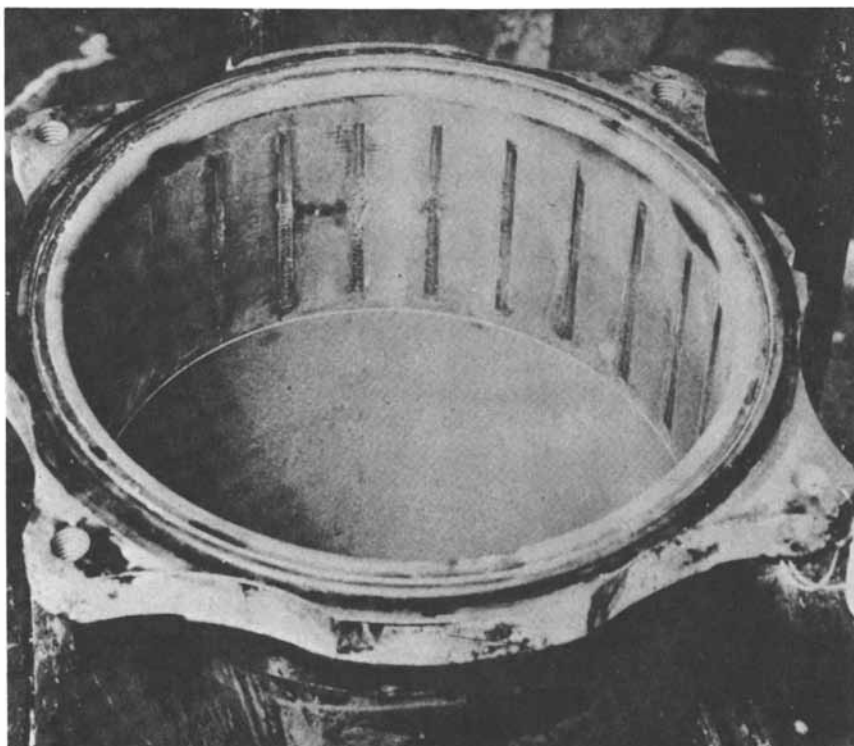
Fretting attack inside engine jacket at contact points with ribbed cylinder liner
